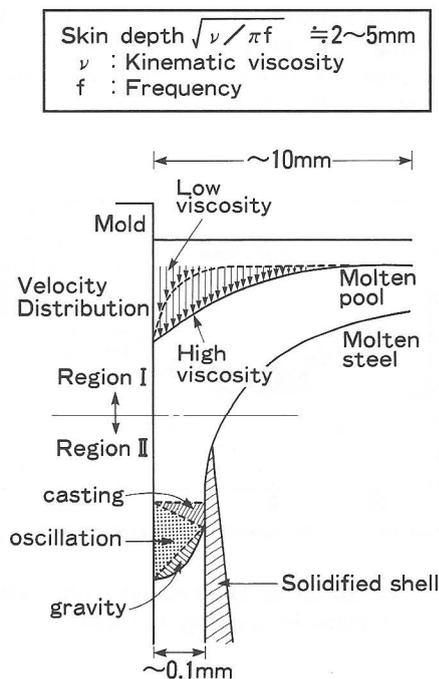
Schematic View of Mold Flux Flow in the Continuous Casting Mold
